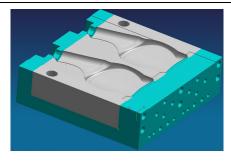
Mould assembly showing base and back plate with water in- and outlets.
